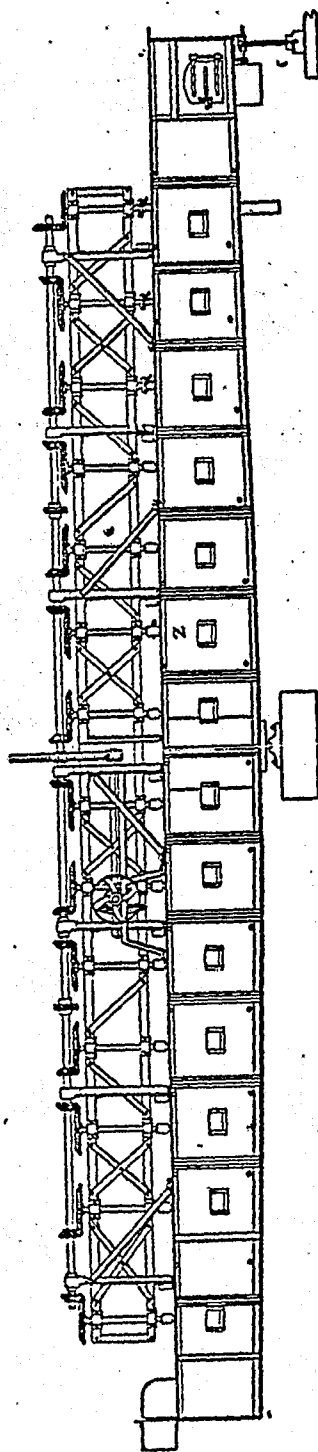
Elevation of Furnace, showing Driving Gear.
